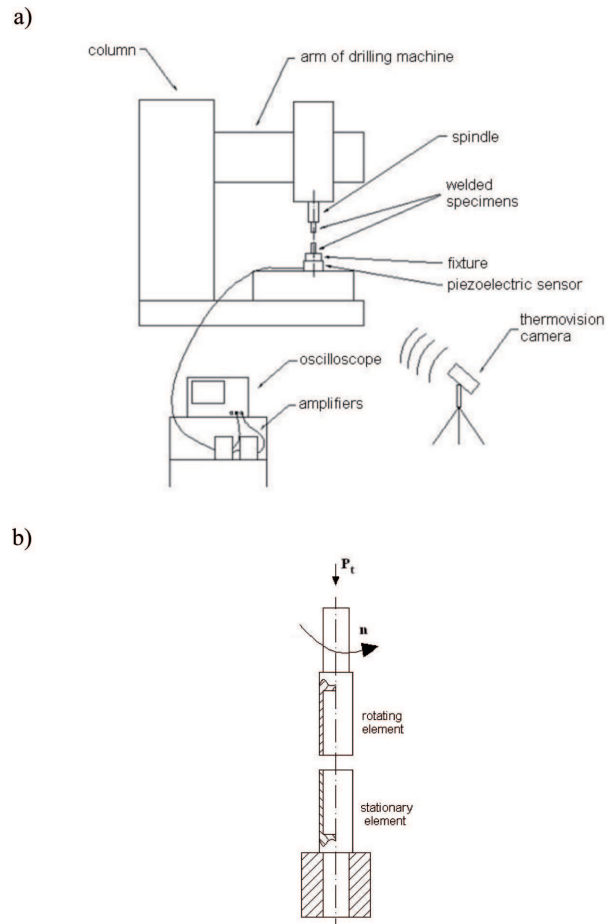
Schematic presentation of the test stand (a) and fixture of the welded specimens (b)
